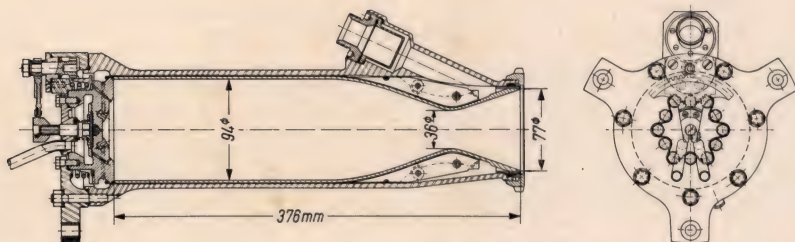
Combustion chamber of engine BMW 109—558 with thrust regulation head
